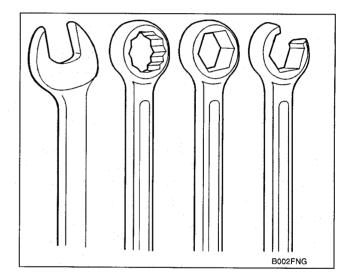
Types of wrench heads. From left, open-end, 12-point boxend, 6-point box-end, flare nut.
